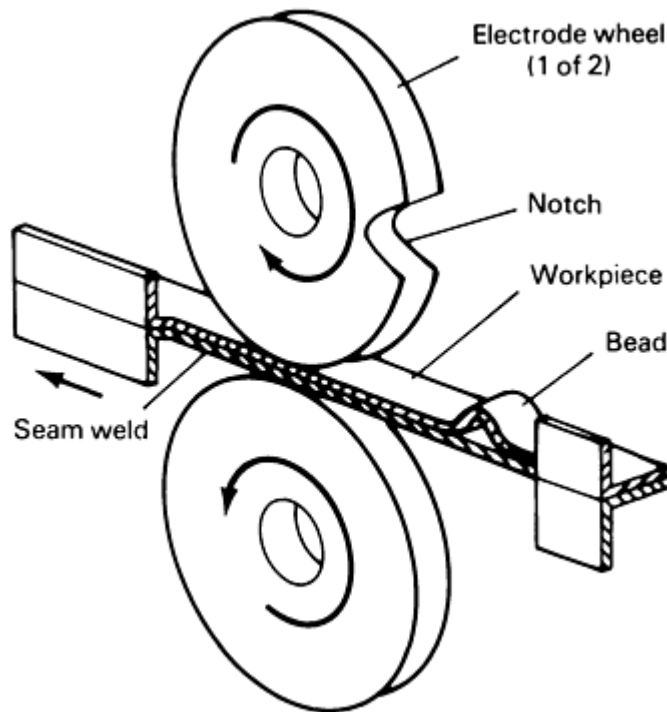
NOTCH ELECTRODE WHEEL USED TO SEAM WELD A WORKPIECE HAVING AN OBSTRUCTION IN THE PATH OF THE WHEEL
